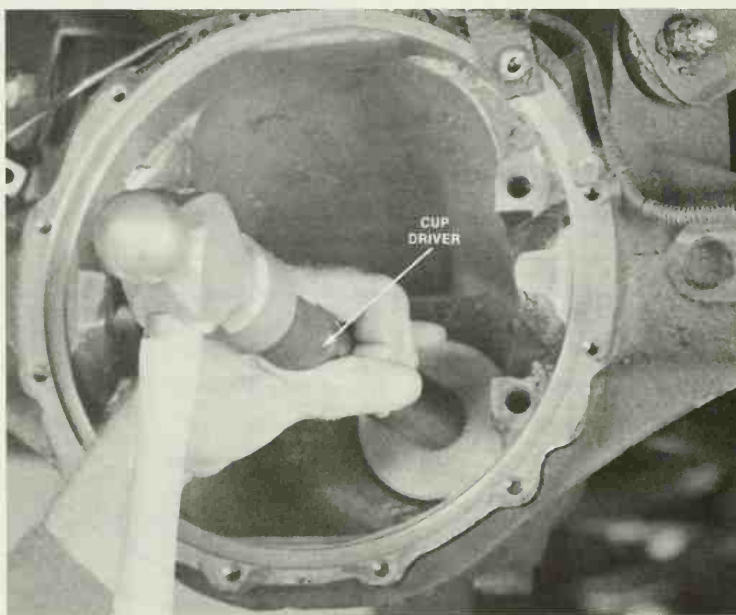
Pinion bearing cups are driven into the case with a cup driver. (American Motors Corporation)
